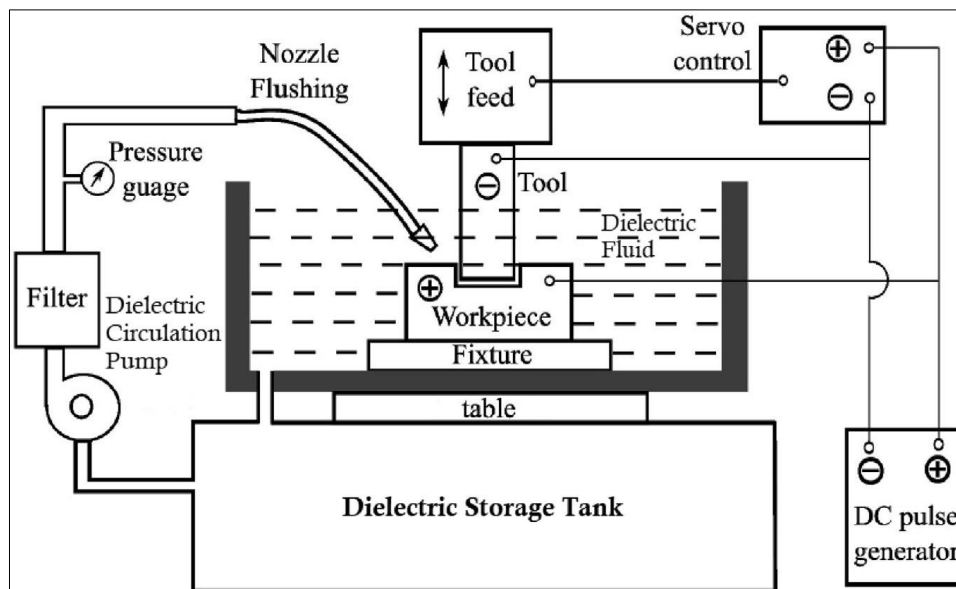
Schematic diagram of a typical setup of electric discharge machine [1].
